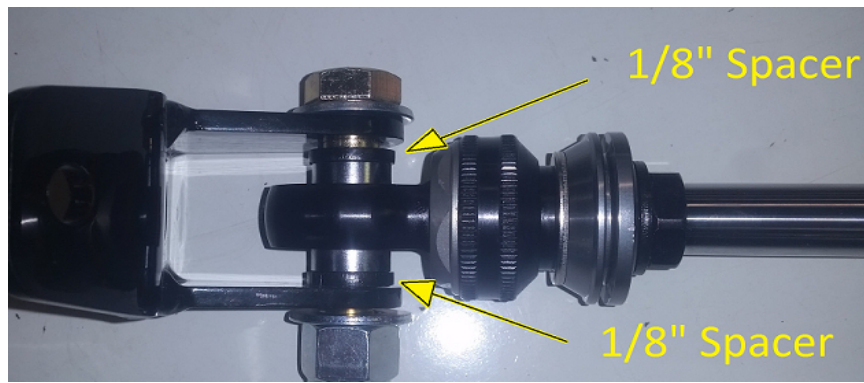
All shock mounting locations without a T-bar use 1/8" spacers
